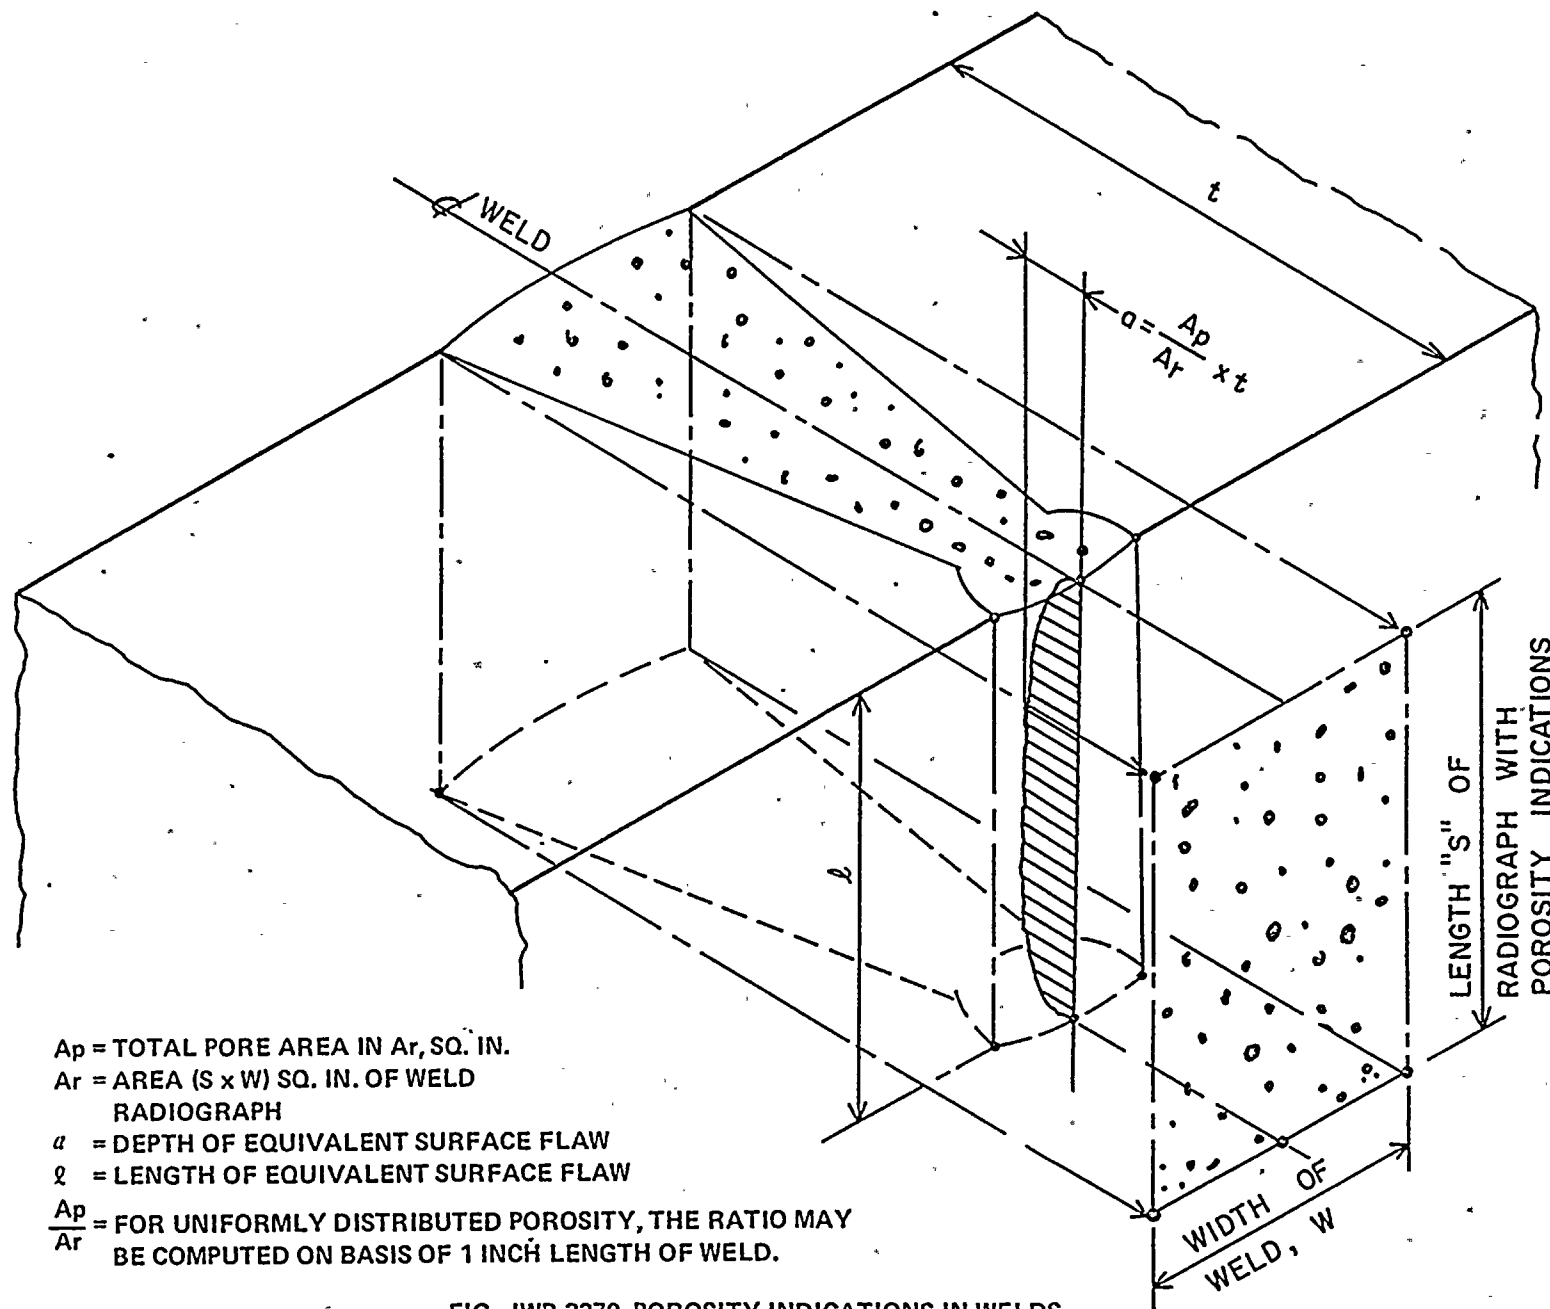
POROSITY INDICATIONS IN WELDS
